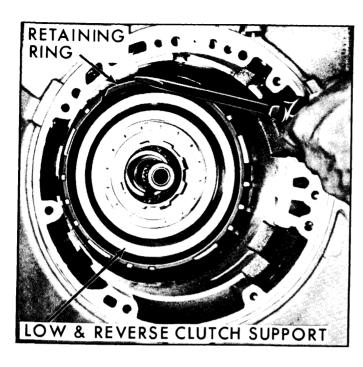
Removing Low and Reverse Clutch Support Retaining Ring
